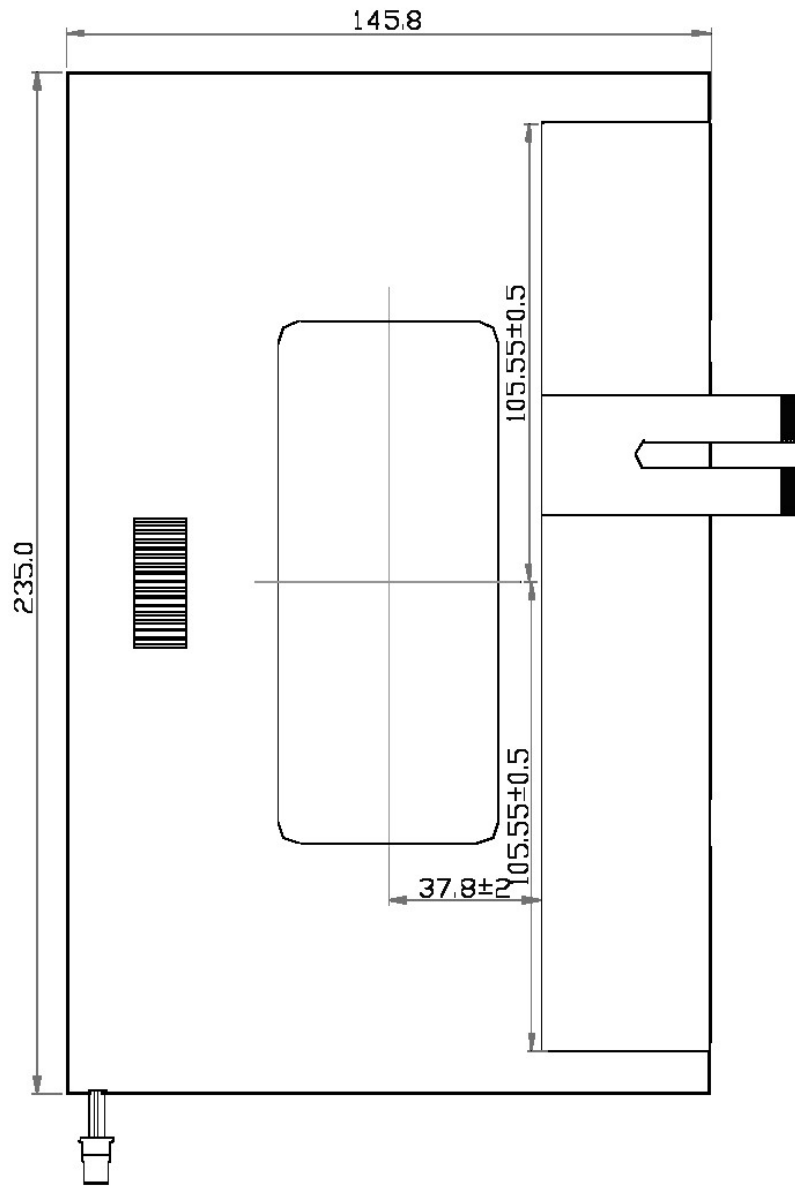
Outline dimensions of TFT-LCD module (Rear Side)
